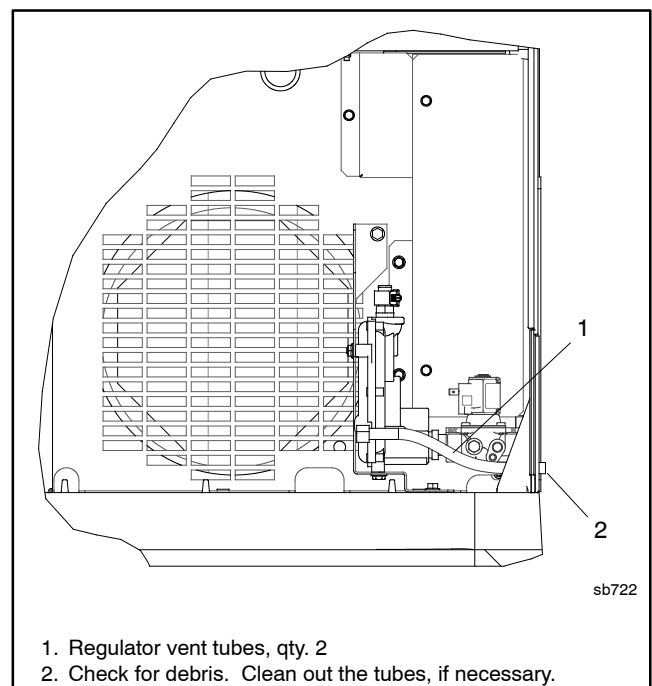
Fuel Regulator Vent Tubes (if equipped)
